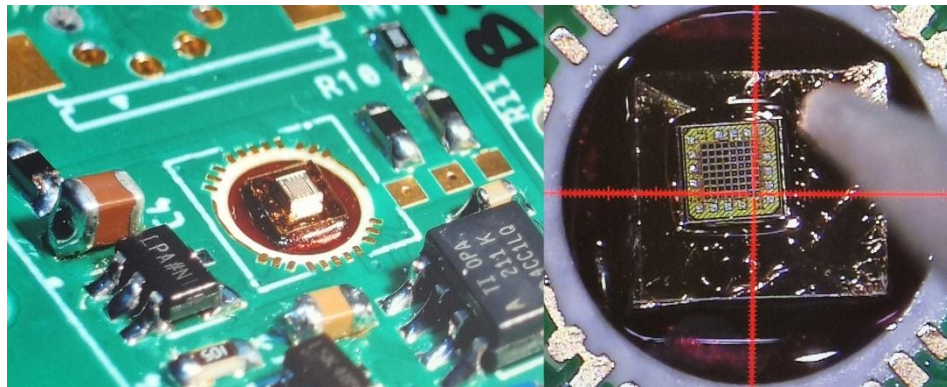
a) PCB with all the components soldered and the detector chip, glued in place; b) process of glueing the detector chip to the board.
